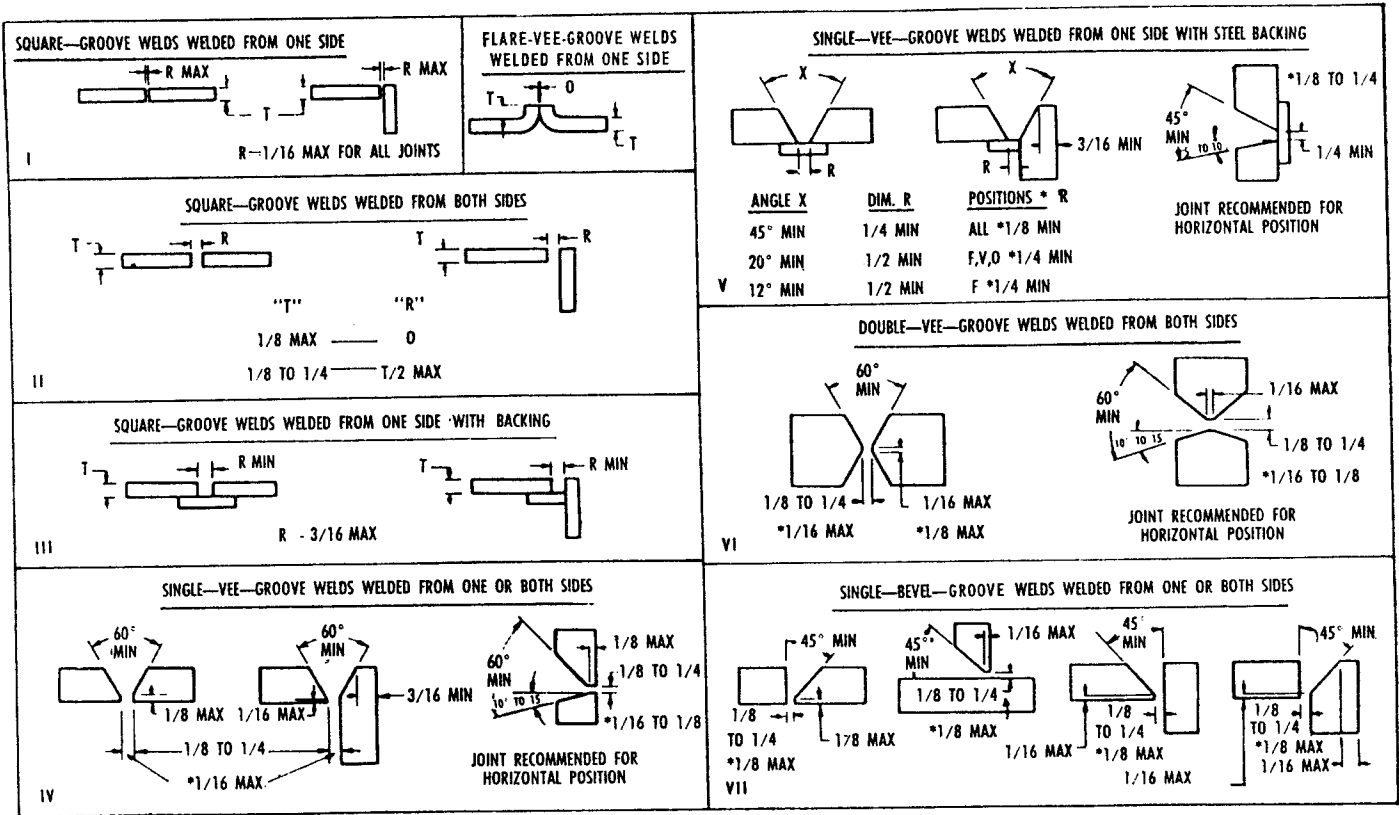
Recommended proportions of grooves for shielded metal-arc, gas tungsten-arc, gas metal-arc, flux-cored arc and gas welding (except pressure gas welding). Note: Dimensions marked \* are exceptions that apply specifically to designs for gas metal-arc welding (34).
